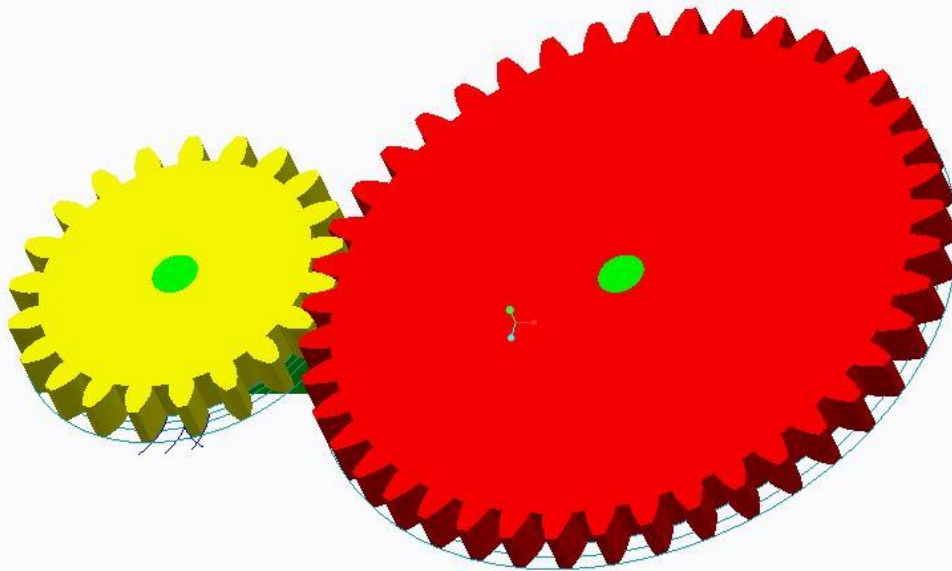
CAD model: Spur Gear (Both gears: Different size)
